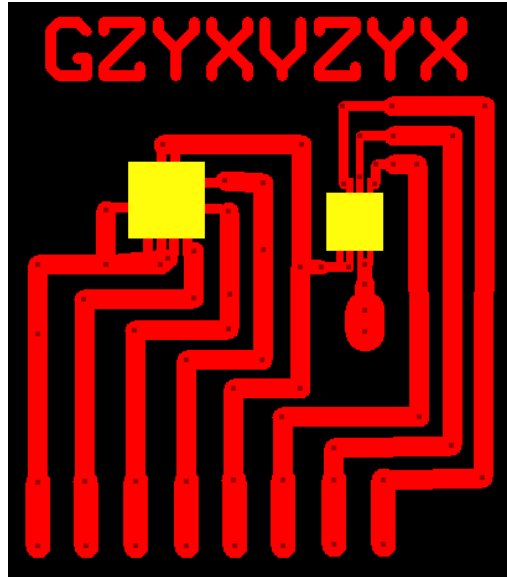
PCB Schematic to test the Analog Devices ADXL330 and Bosch BMA140 accelerometers
